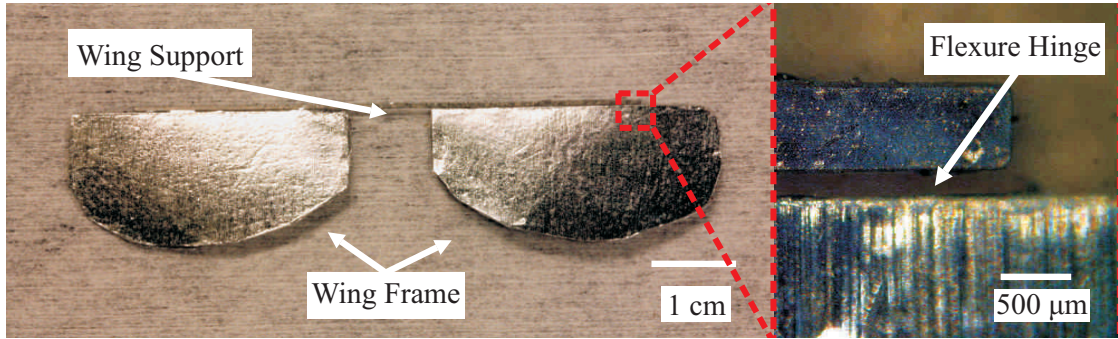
100 μm thick aluminum wing frames mounted on 12.5 μm thick mylar wing membrane bonded to 6 cm long stainless steel wing supports
